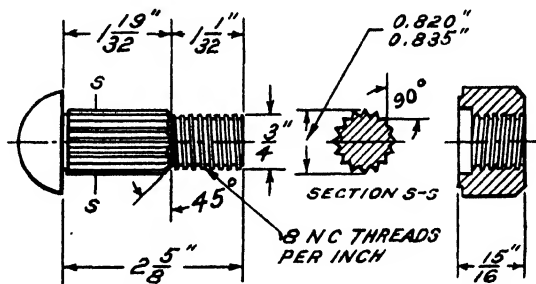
To produce this form of hot-headed Dardelet rivet-bolt with serrated stem, a special form of header, similar to a cold header, is used, but the entire bar is heated and is forged and sheared to length as fed.
